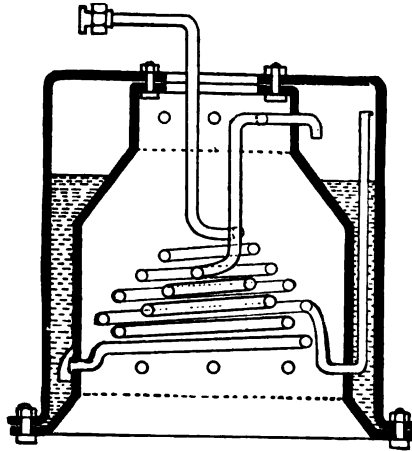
Sectional Elevation of the Morgan Boiler, formerly used on the Toledo Carriage. The disposition of the coils may be understood from these cuts, also the steam connections through the superheating coil. The sectional view shows the steam superheating and one of the generating coils in position, with connections indicated for other coils. As shown, the steam enters a vertical tube somewhat below the top of the steam space; thence flowing downward, through one of the coils above the fire and out to the engine through the feed pipe.
